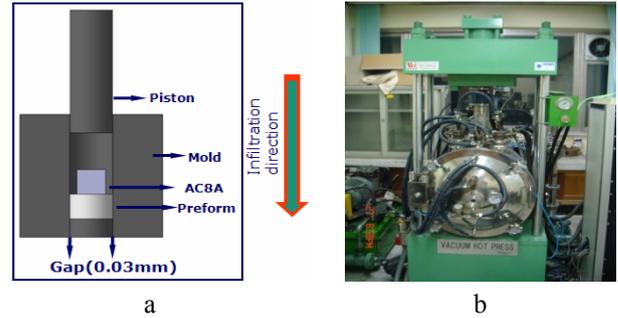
(a) mold of manufacture MMC, (b) vacuum hot press
